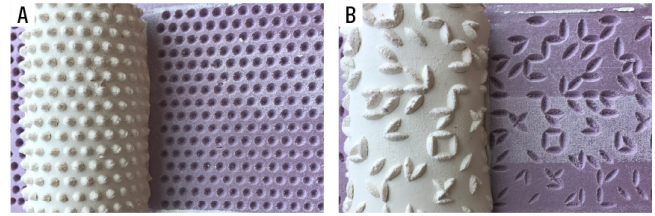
Initial tests using Millipath for textured mold for clay emphasize the end-mill geometry used in carving. A) Clay doesn't fill the dot-like textured mold, producing roundly shaped spikes. B) Clay has room to expand in the linear etchings, creating sharper features.
